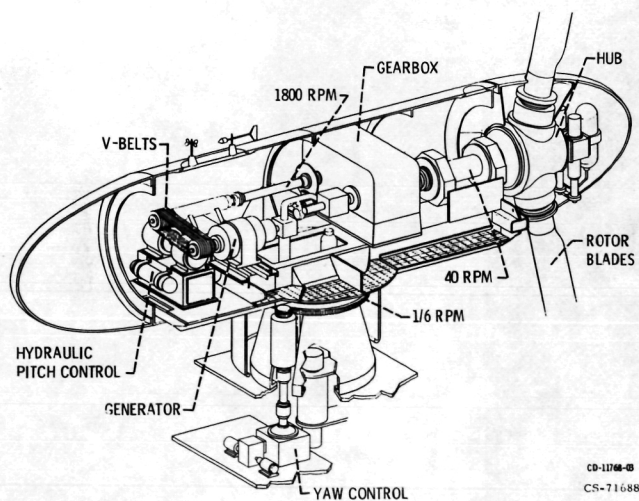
100 kW wind turbine drive train assembly and yaw system.
